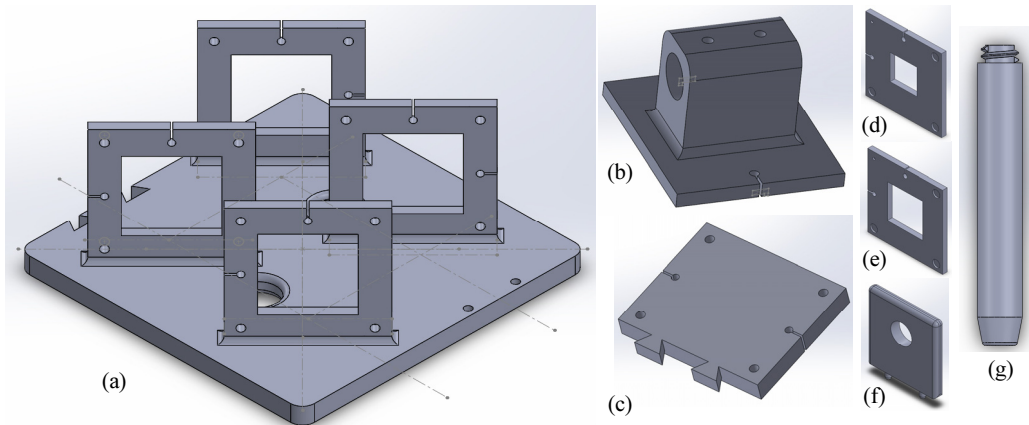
3D CAD image of the components used in 3D printed Mach-Zehnder interferometer: (a) a interferometer body (b) a laser holder (c) a base of laser holder (d) a mirror attachment plate (e) a beam splitter attachment plate (f) a lens holder and (g) a body post.
